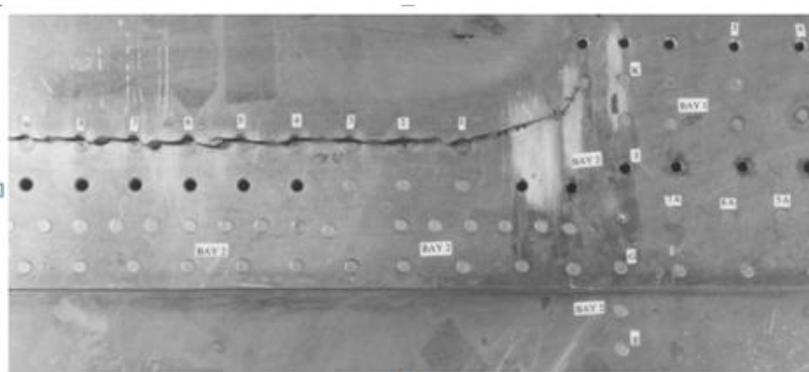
Larger crack formed by the link-up of fatigue cracks at adjacent rivets
